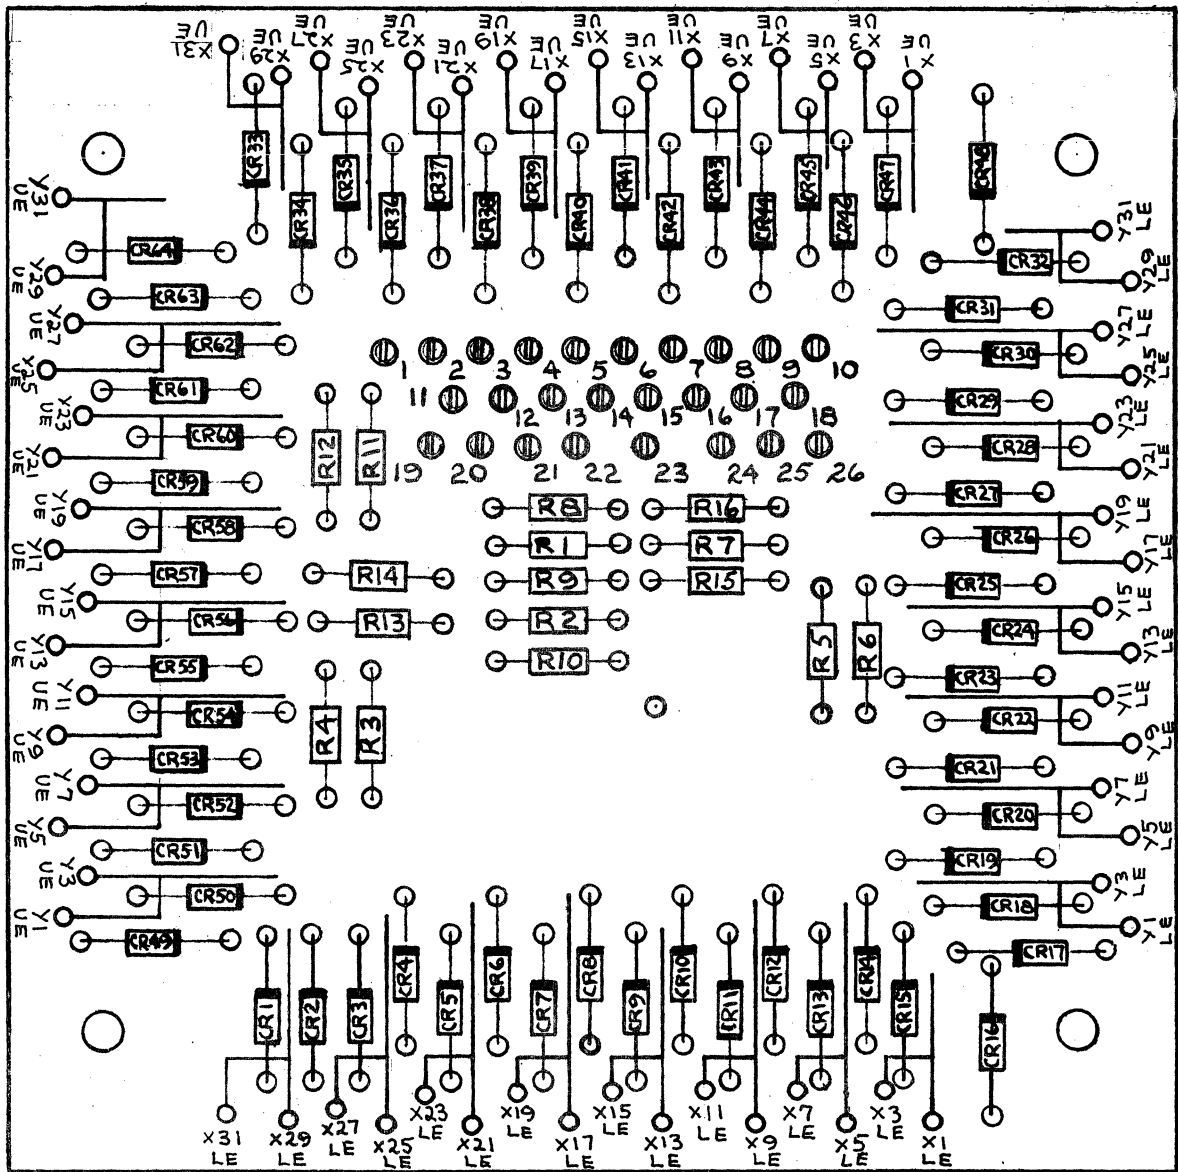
Bottom End Plate, Matrix Module, Assembly 11935
